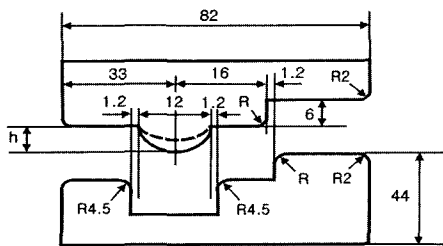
Sectional view of a circular-and-stepped drawbead die set
